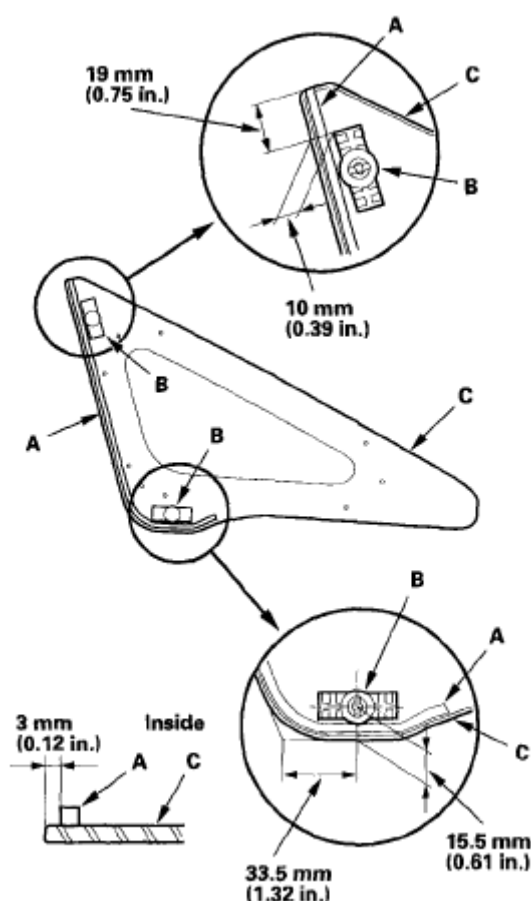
Attaching Rubber Dam And Clips With Adhesive Tape To Inside Face Of Front Corner Glass (With Specifications)
